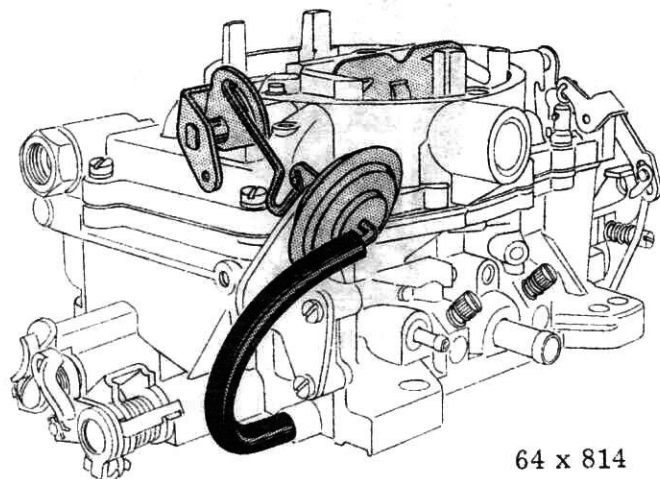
AFB Carburetor with Diaphragm Choke Modulator (FirePower 360 Engine)
